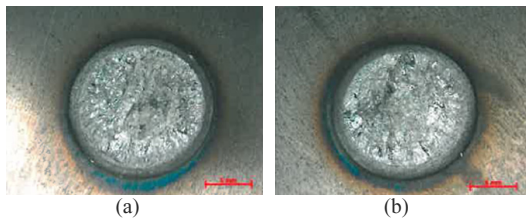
Pictures of fractured surfaces for measurement of nugget diameter (a) Specimen 1 (b) Specimen 2
